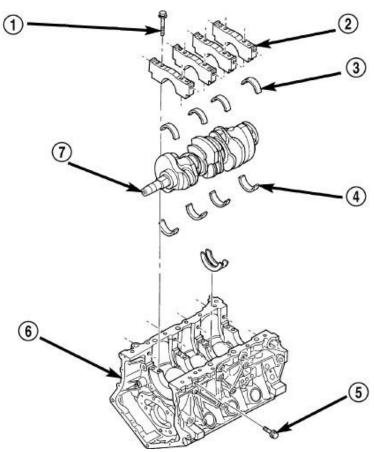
Engine Block & Crankshaft Courtesy of CHRYSLER LLC
